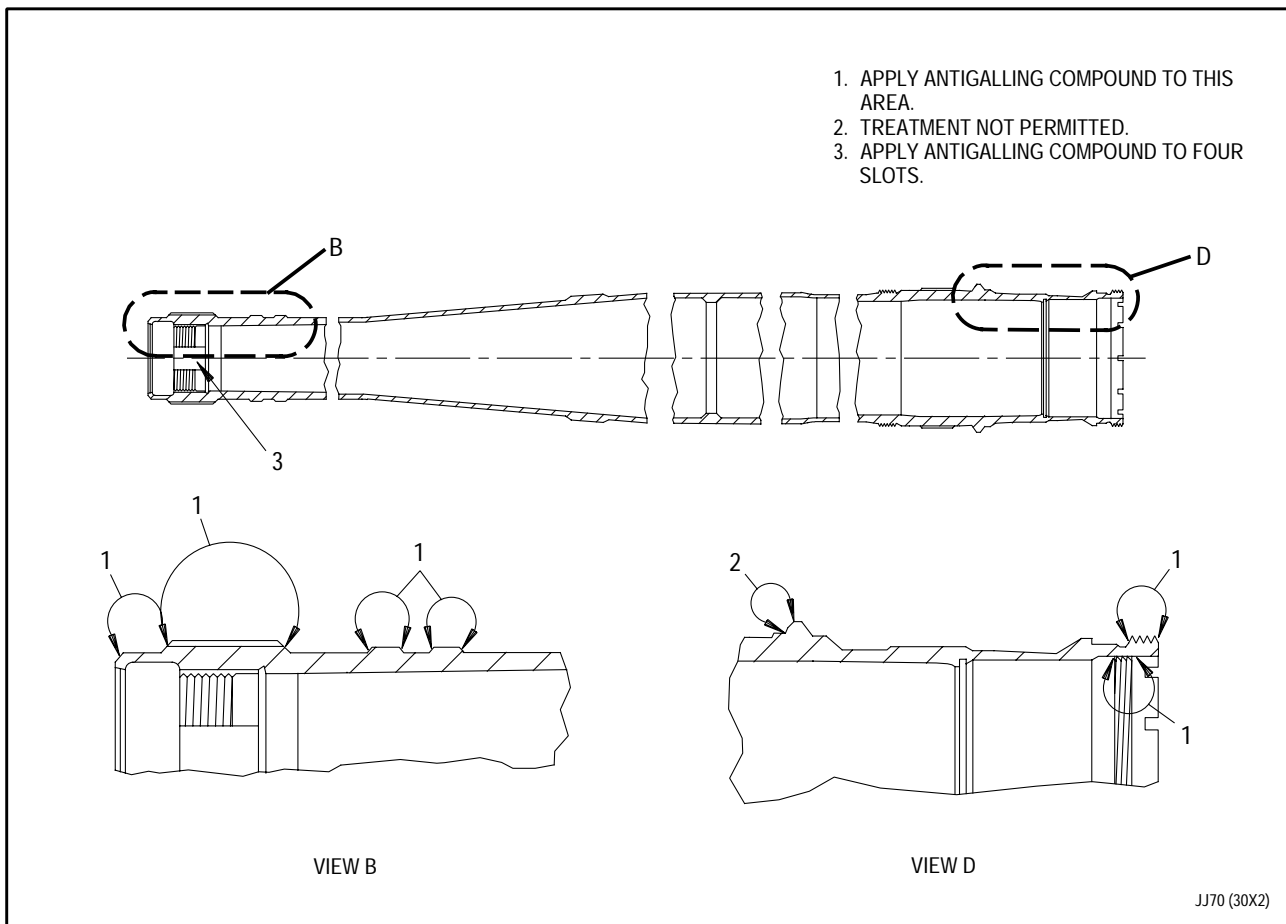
Front Compressor Drive Turbine Shaft Assembly - Antigalling Compound Application
